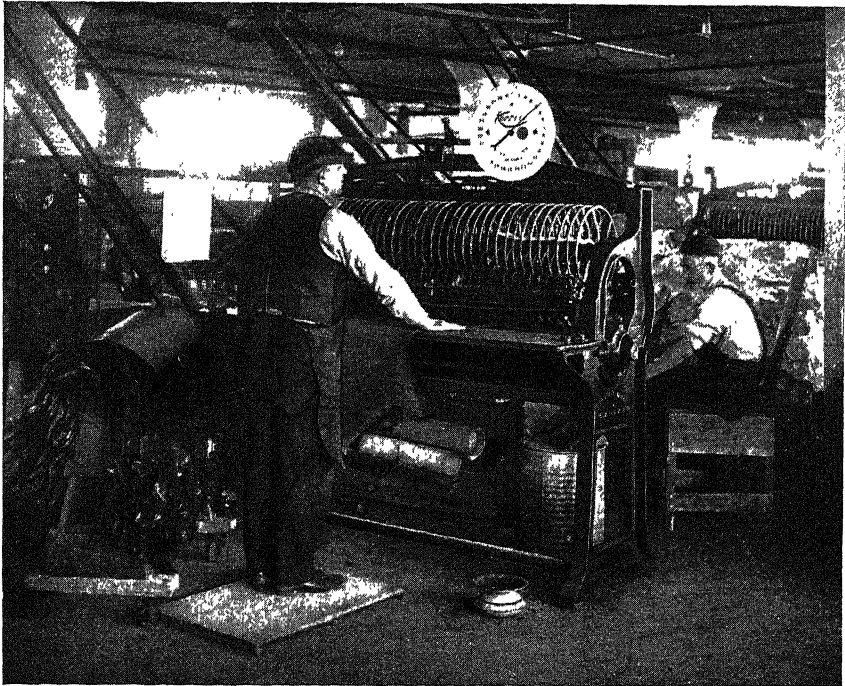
A jacking machine. This machine makes the hide flat and smooth so that it can be split into two thin sheets.
